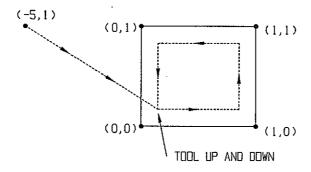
Starting and Ending Cutter Compensation (G42)
